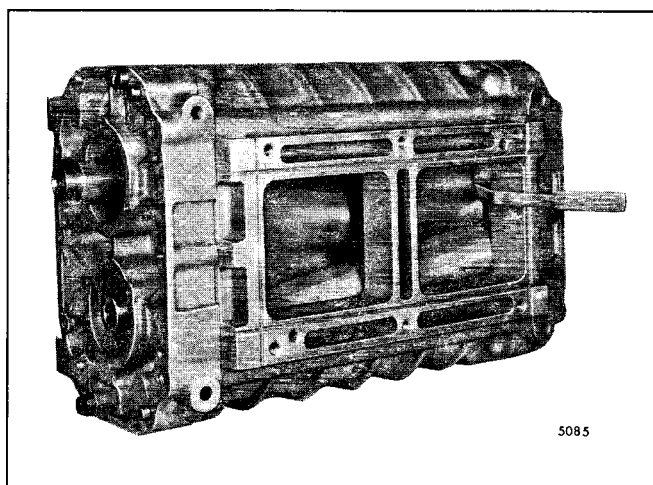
Measuring End Clearance Between Blower Rotors and End Plate
